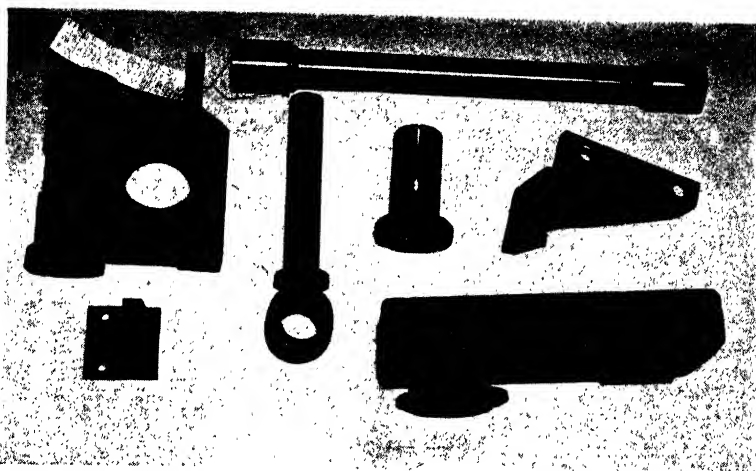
These structures are examples of machined weldings, some of which are fast-moving or heavy service units such as the long spline shaft, ground pin, or swivel sheave housing, while others serve as bolt lugs, brackets, or gear cases (lower right) without actually being moving parts. (Courtesy of R. G. LeTourneau, Inc.)
